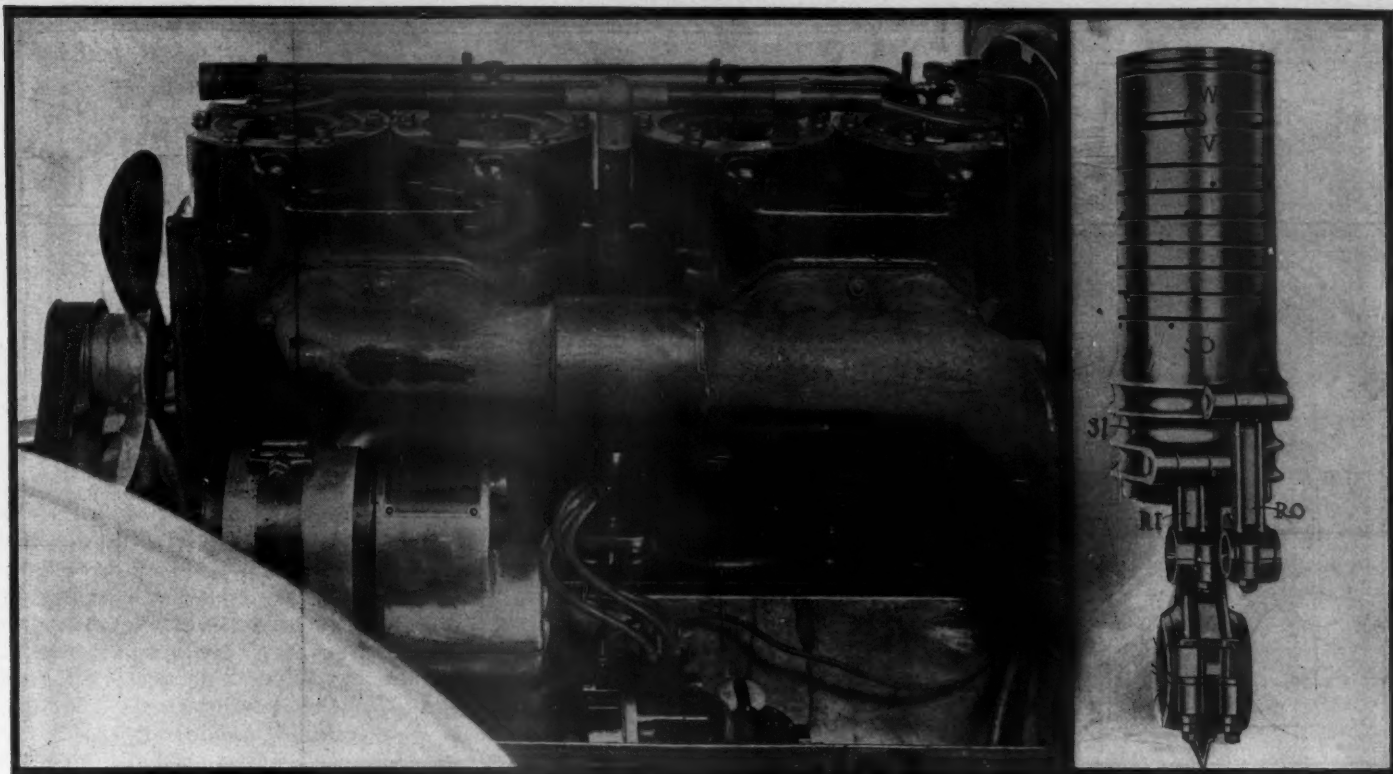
The exhaust side of the Stearns-Knight 38-horsepower sleeve-valve motor for 1912. Two magnetos are shown, the Mea to the right for the regular ignition and the other one located above the water pump is for the electric light system on the car. At the right are the two sleeves inside each other and ready to be put in a cylinder. The piston is inside of the two sleeves
